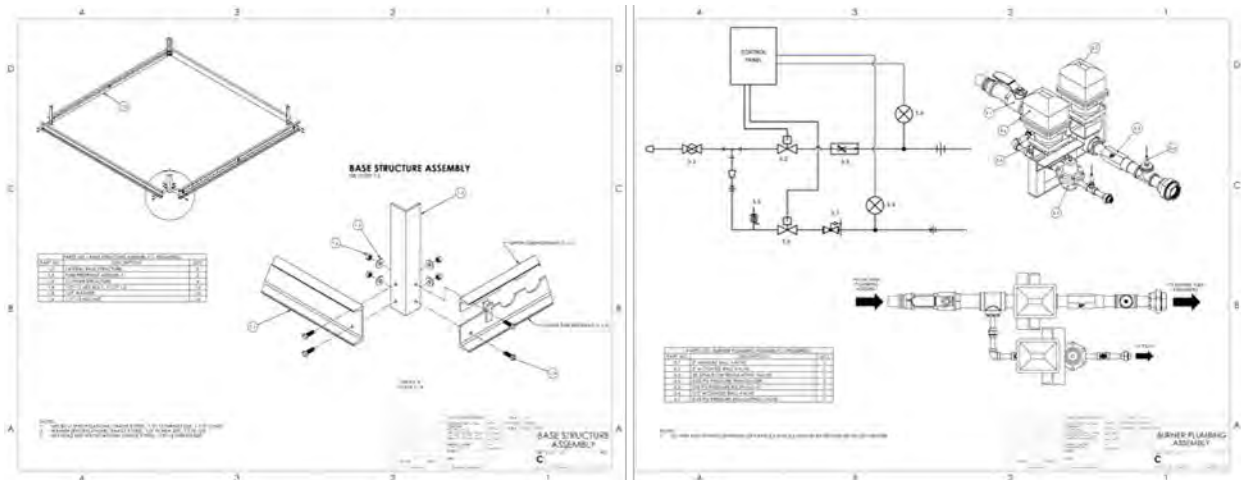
Sample of TDP Drawings Showing Assembly Type Drawings (left) and Valve Schematic and Assembly (right)
